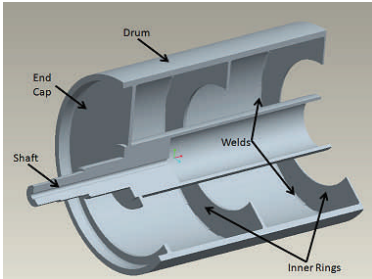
Half symmetry cutaway schematic showing the major components that make up the forming roller assembly.
